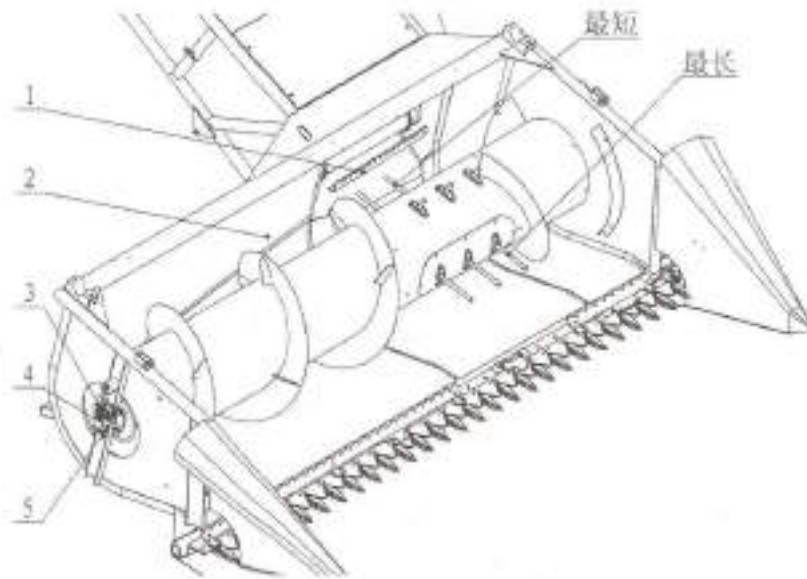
Adjustment of the Spiral Conveyor of the Cutting Table
